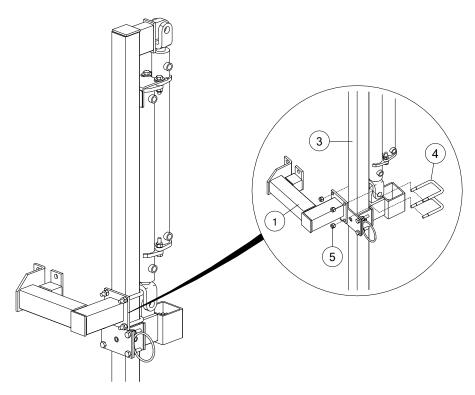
Installing the Lower Mount Plate to the Slide Tube
